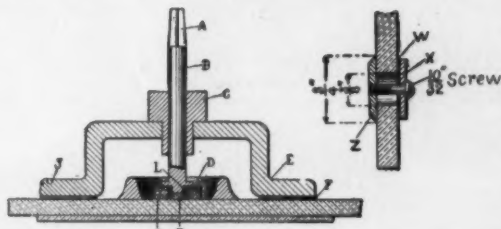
APPARATUS FOR BORING LARGE HOLES IN GLASS. Fig. 2.—METHOD OF REPAIRING CRACKED PLATE GLASS.
